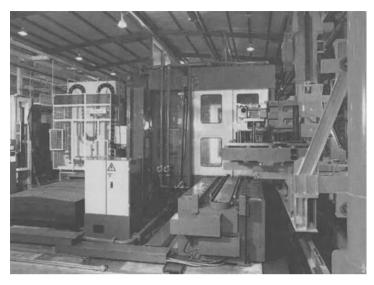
The large prismatic machining line, consisting of travelling column machining centres (three). Pallets are transferred by rail-guided vehicle with "coded" programmable microchip pallet identification. [Courtesy of Yamazaki Mazak Ltd.]
